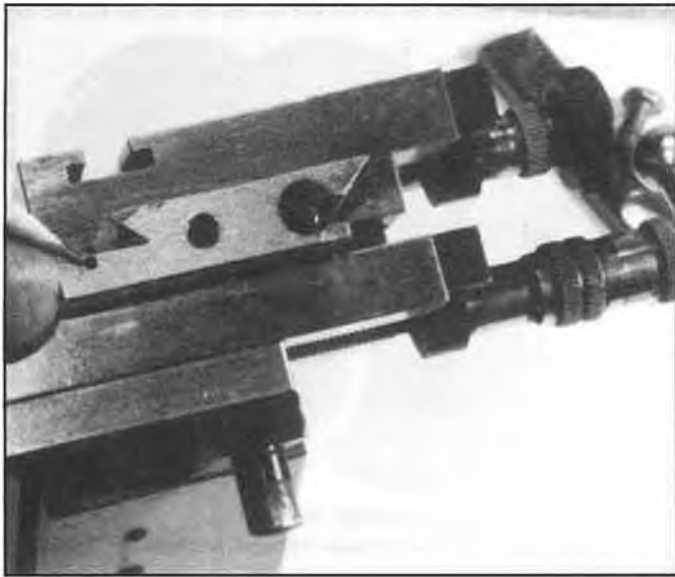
Dowel pin hole for longitude bracket. Large hole is for screw. Larger hole is the crank feed-screw.
